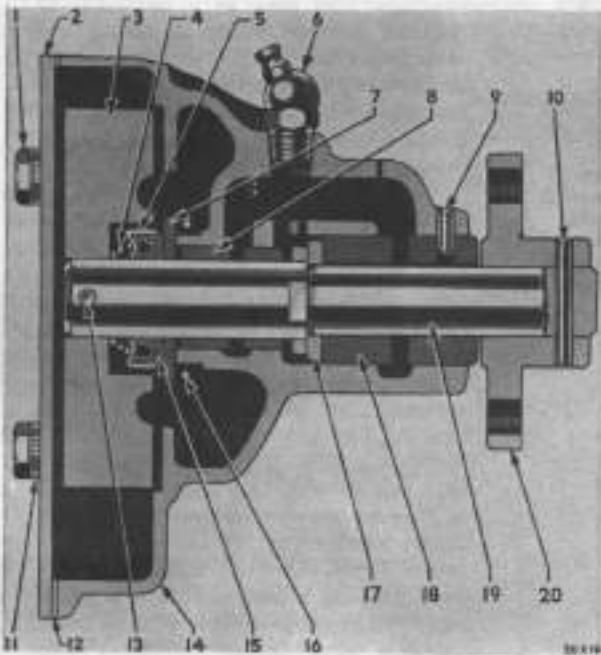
Sectional view of water pump as used on Chrysler engine models T57, T81, T96, T-105 and T116.
